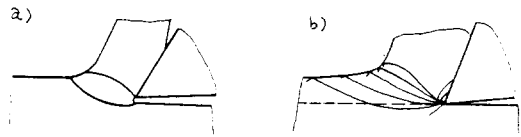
Machining models with shear zone extending below machining surface (a) Oxley's Model (b) Zorrev's Model
